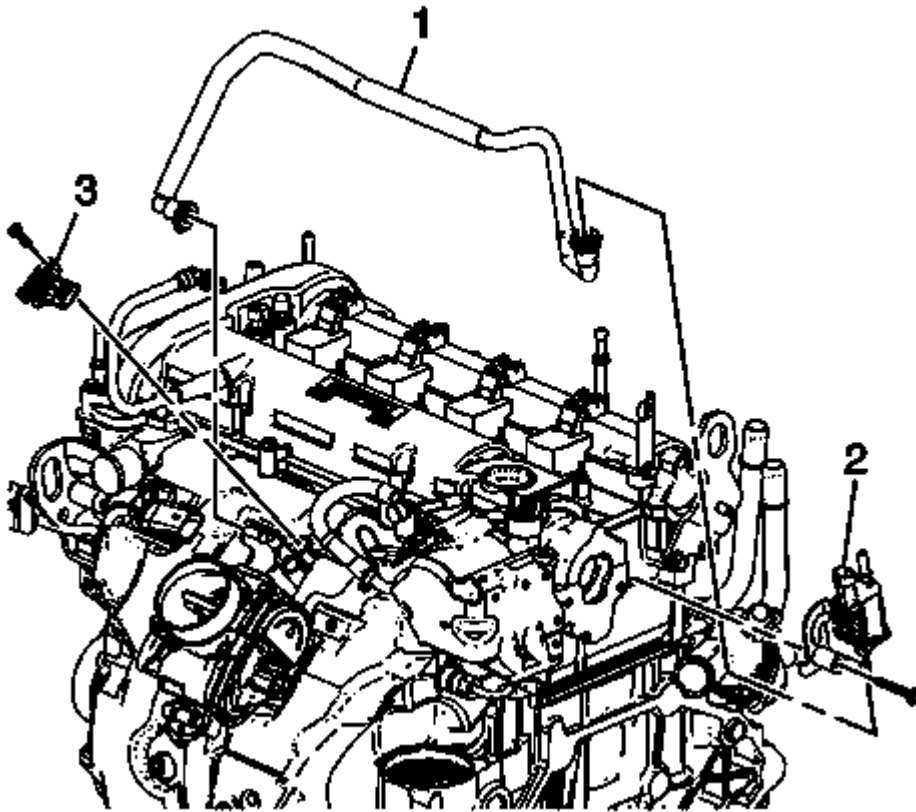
EVAP Canister Valve, Tube & MAP Sensor
